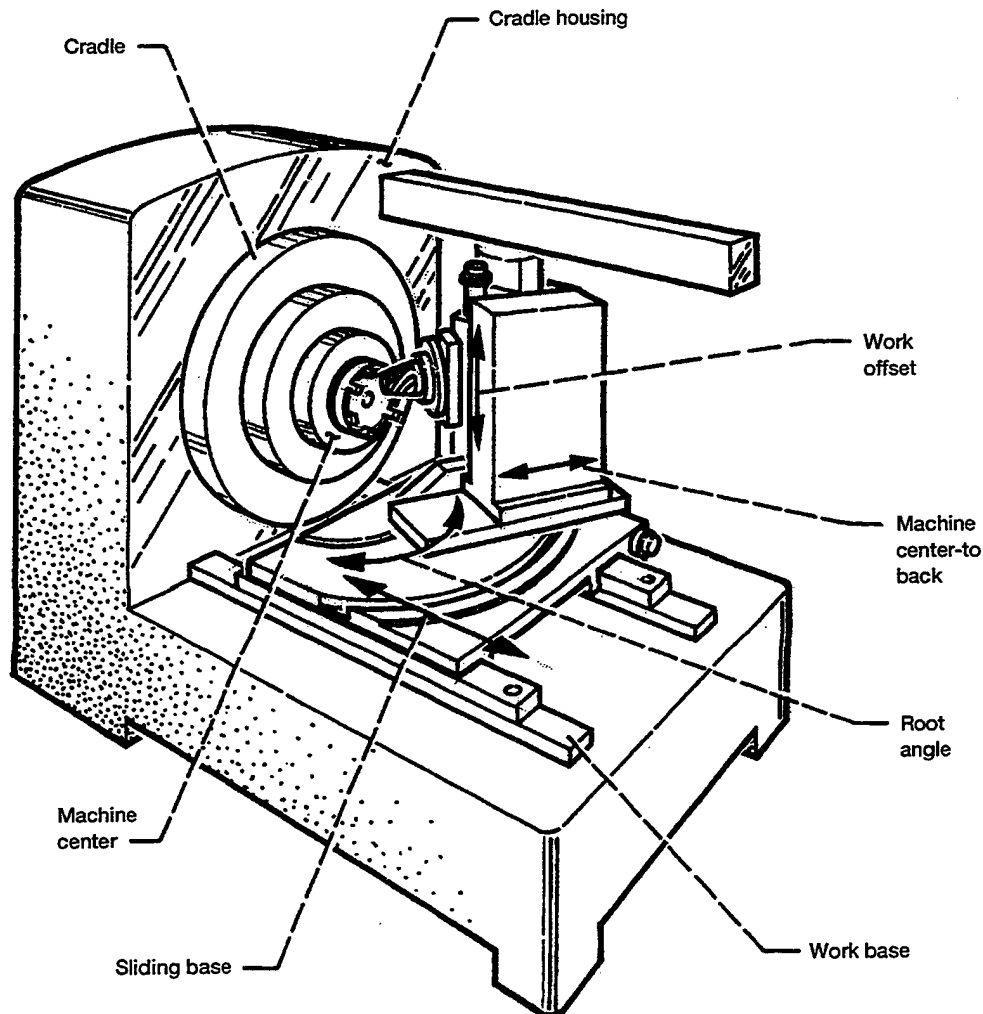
Machine used to generate spiral bevel gear tooth surface.
